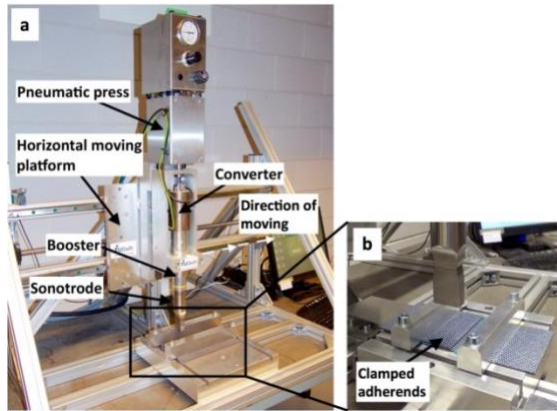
(a) Setup for continuous ultrasonic welding (b) close-up of clamped adherents. The displayed sonotrode is rectangular 14.9 mm by 30 mm.
